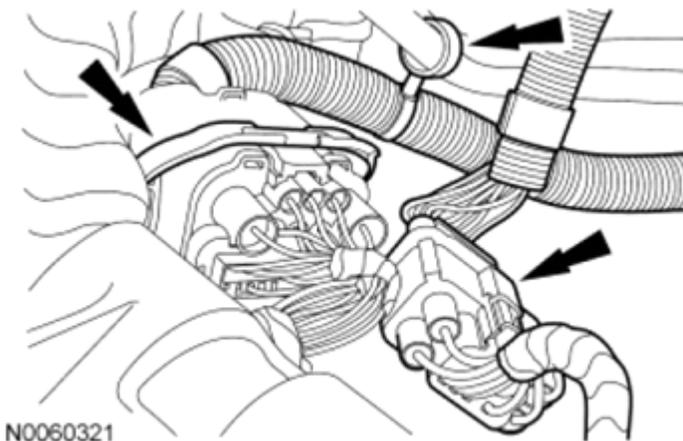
Locating Electrical Connectors And Wiring Harness Retainer
